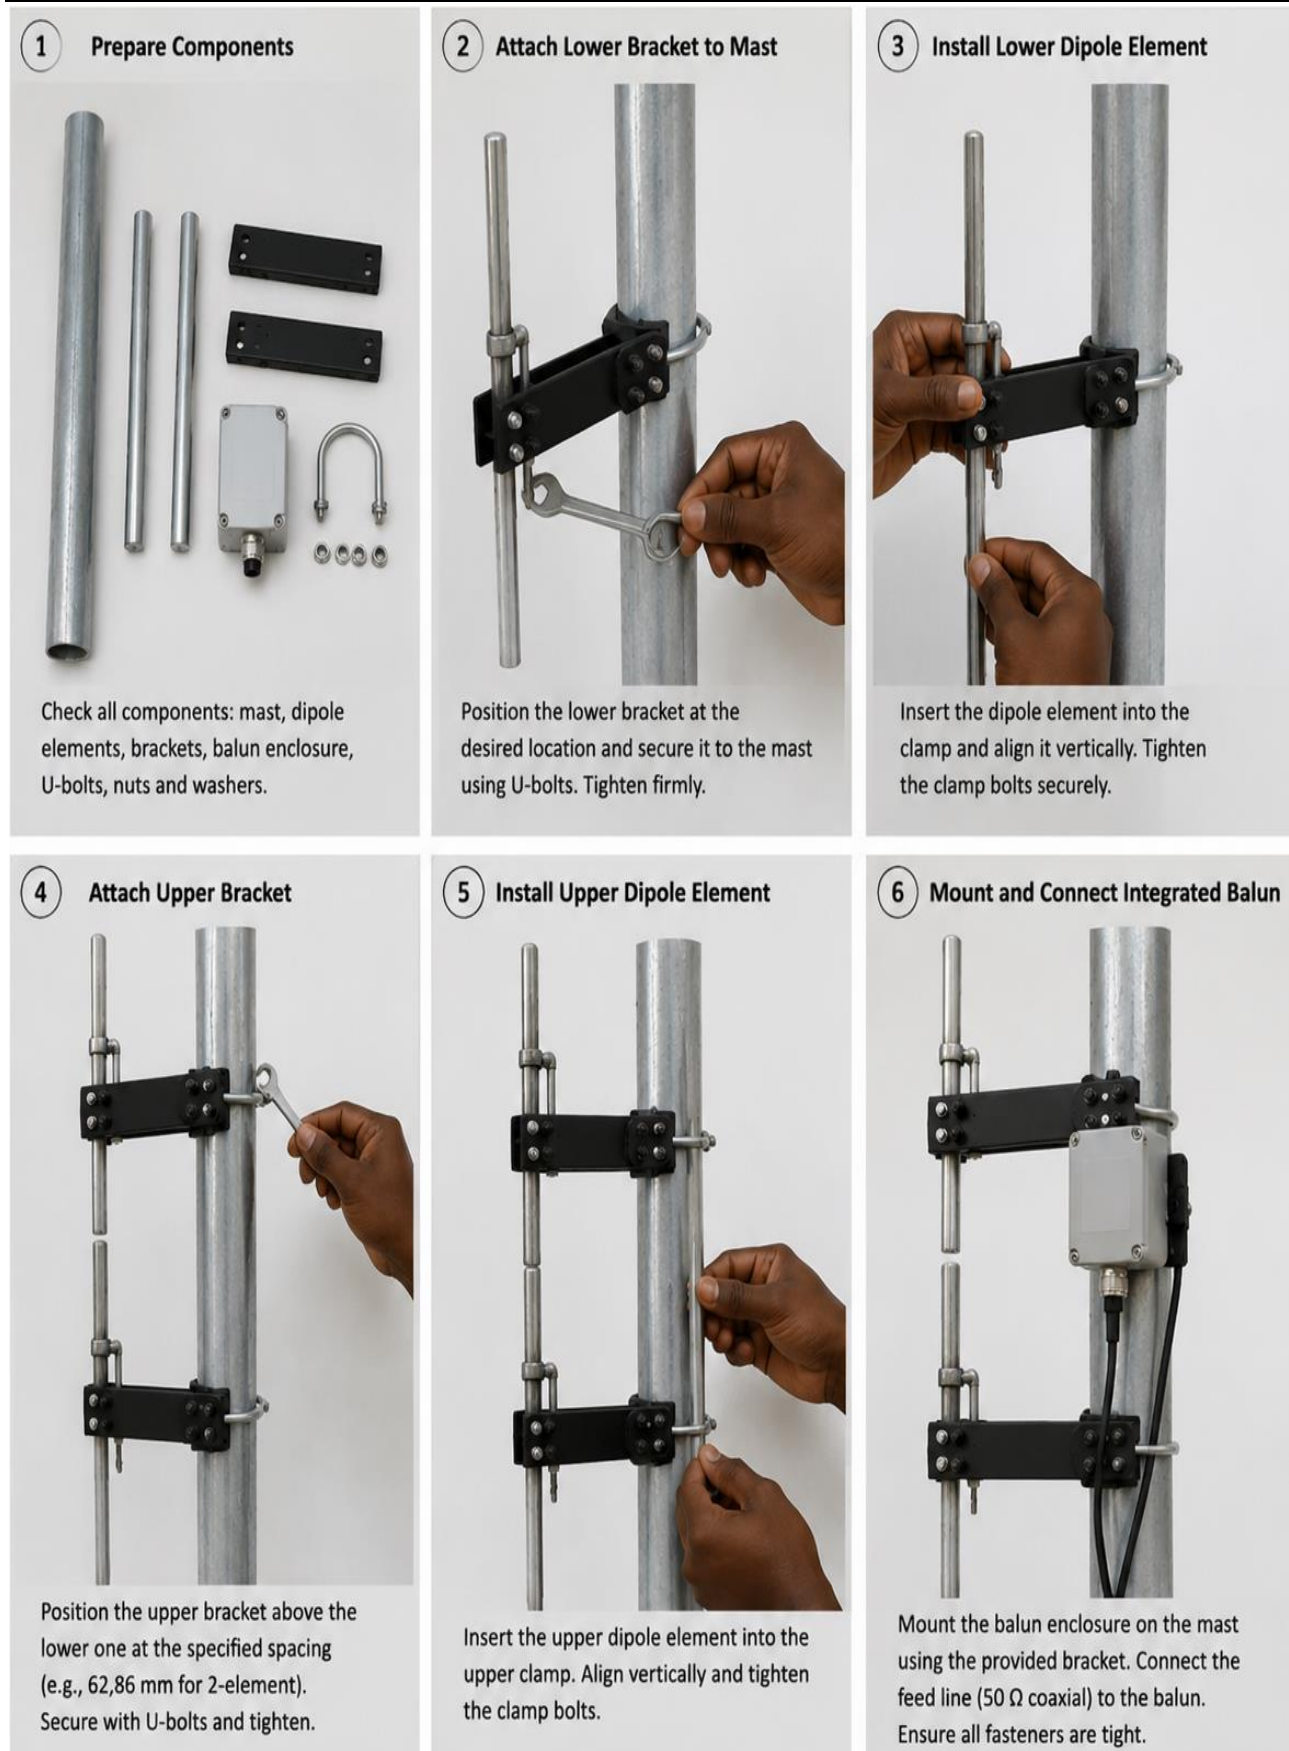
Mechanical assembly and alignment of the principal antenna components.
